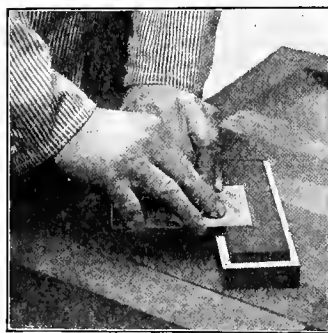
Oil-Stoning Flat Side of Scraper to Remove Feather-Edge
